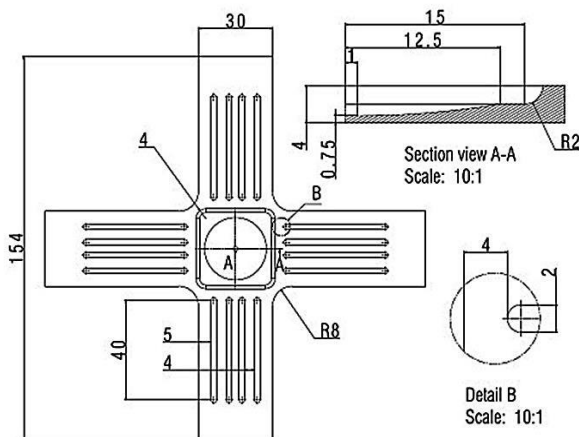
The Lionel cruciform specimen for considering material fracture behavior [7, 16]
